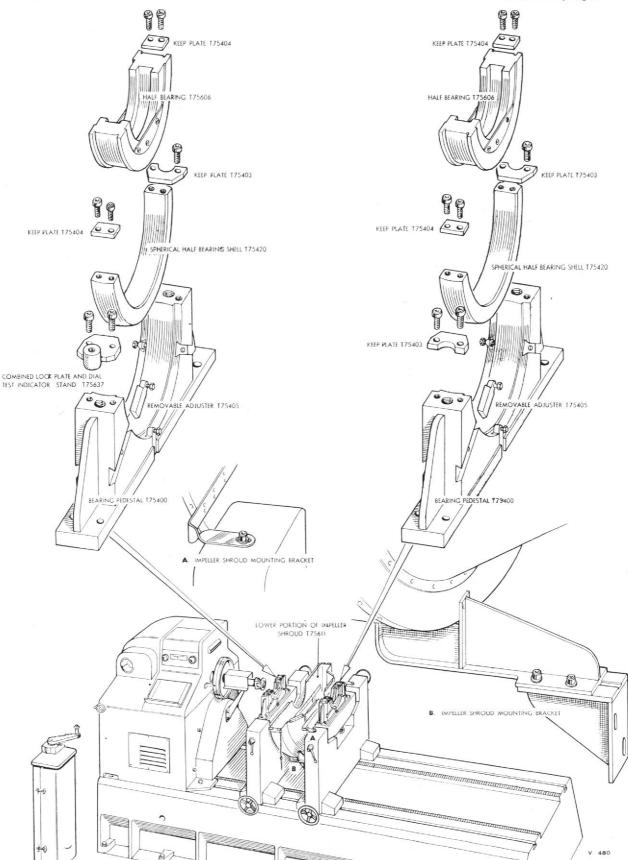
Setting up Avery type 7208 balancing machine for impeller.
